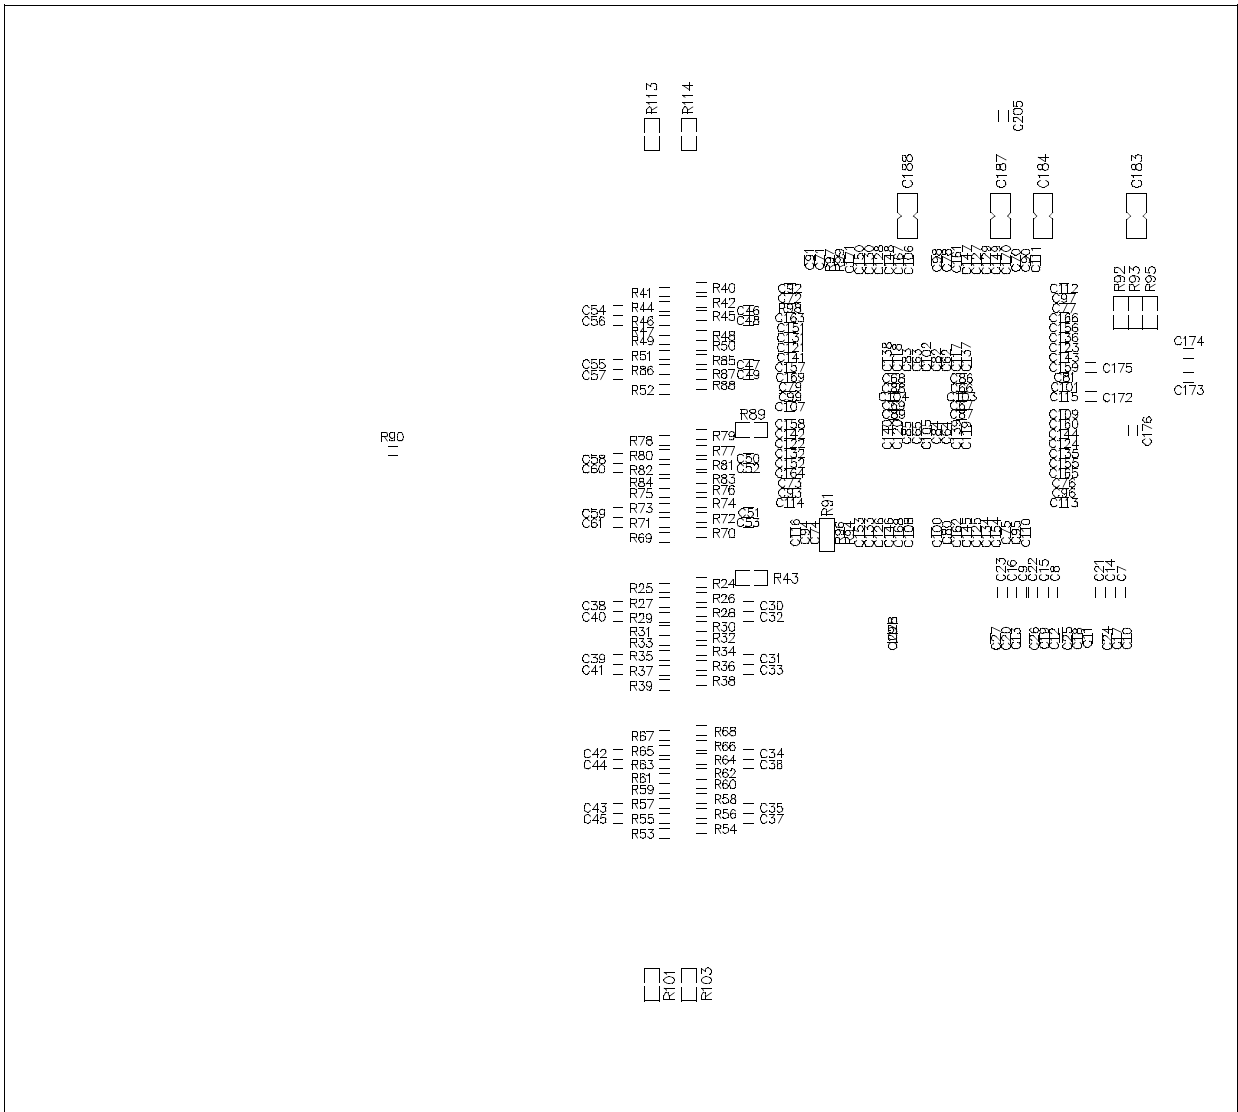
S1D13U00P00C100 PCB Layout (Bottom)
